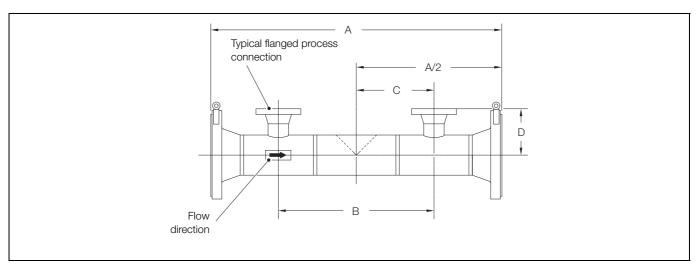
Model WMF with RFWN end flanges – sizes 40, 50, 80 mm (1¹/₂, 2 and 3 in.)
